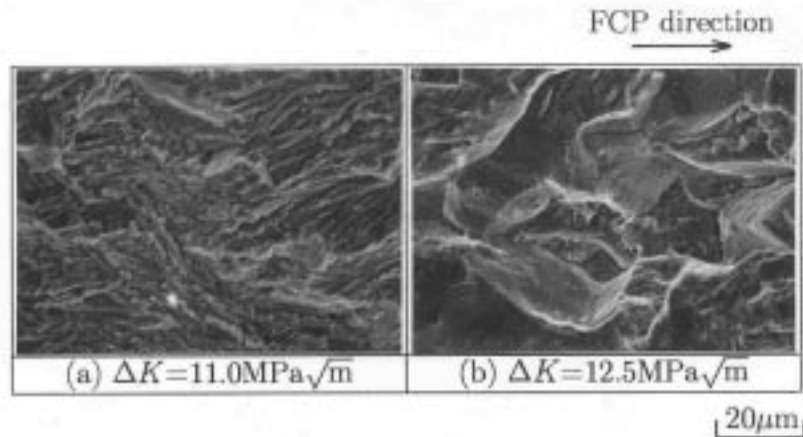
SEM micrographs of fracture surfaces in a parallel type specimen, SP-P, ($R=0.05$): (a) weld bead, (b) heat affected zone (HAZ).
